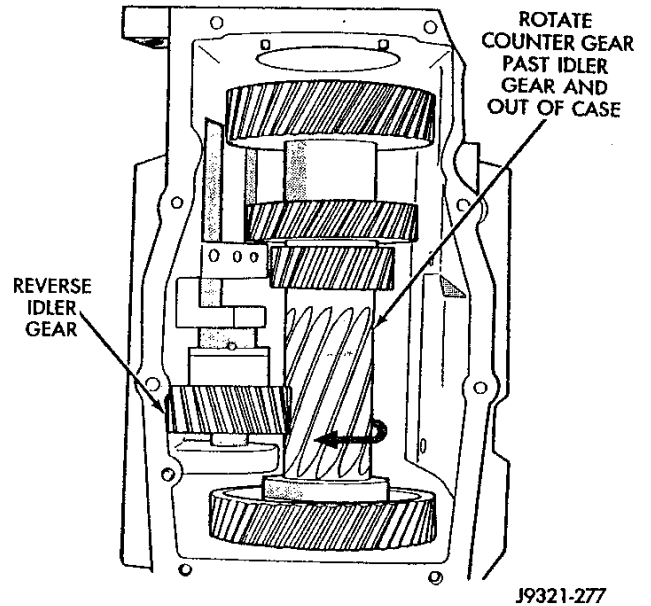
Counter Gear Removal (With New Style Gear Case)
